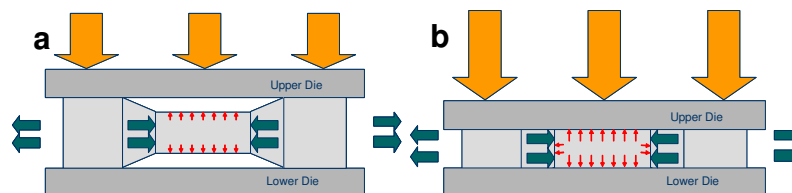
Conrod stem upsetting process, (a) forging start, (b) moment when the workpiece stem touches upper and lower die cavities.
